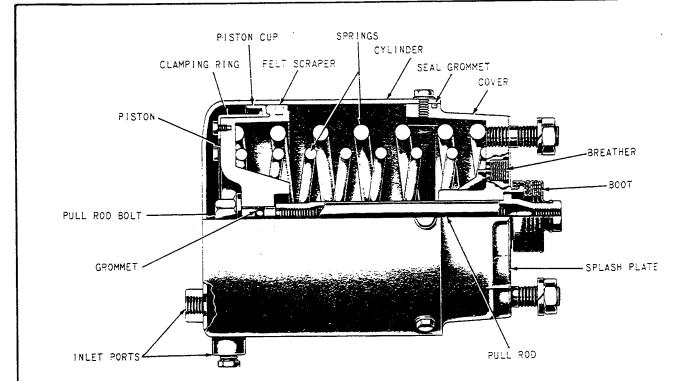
SECTIONAL VIEW SPRING BRAKE ACTUATOR
